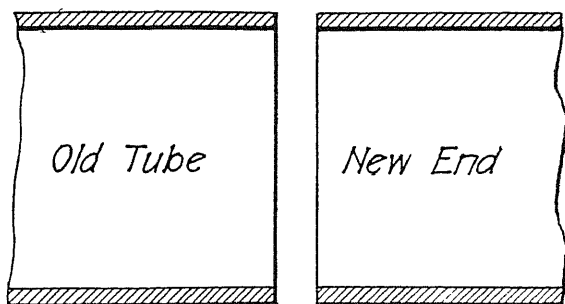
Ends Prepared for a Straight Butt-Weld.
